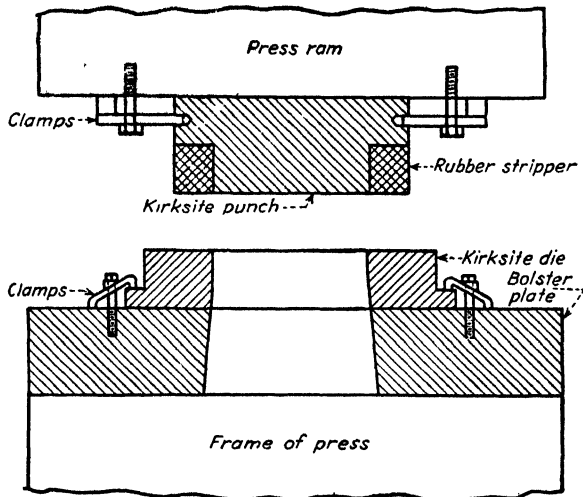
In this cast-blanking-die setup on a punch press, a rubber block is used in place of a stripper plate. The dies are cast in sand molds, and very little machining is required to finish them.
